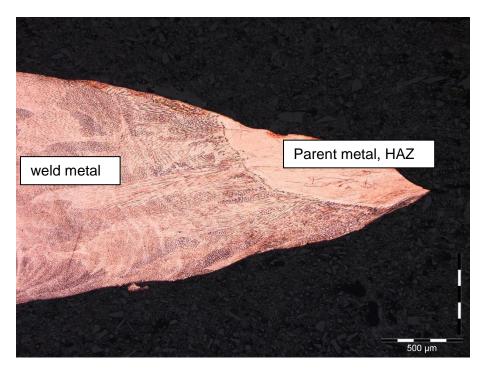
Tapered ductile fracture point of vessel, adjacent to weld. (Image No. 14373 met-1-1.jpg)
